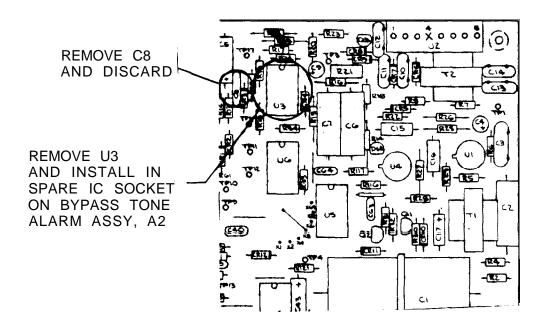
Remote Control PC Board Assembly, Right Rear Corner
